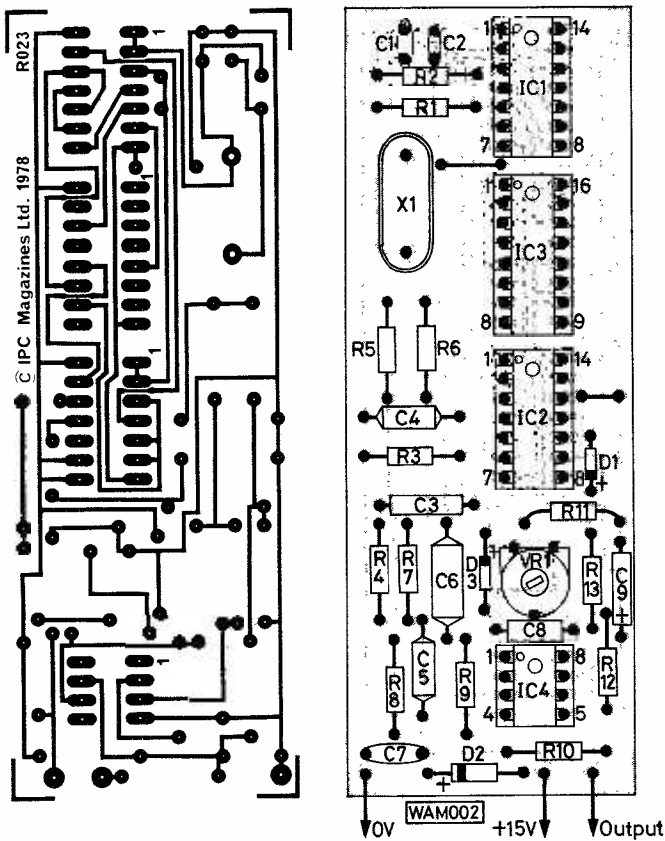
(left): Copper track layout of the p.c.b. shown full size and (right) the component layout
